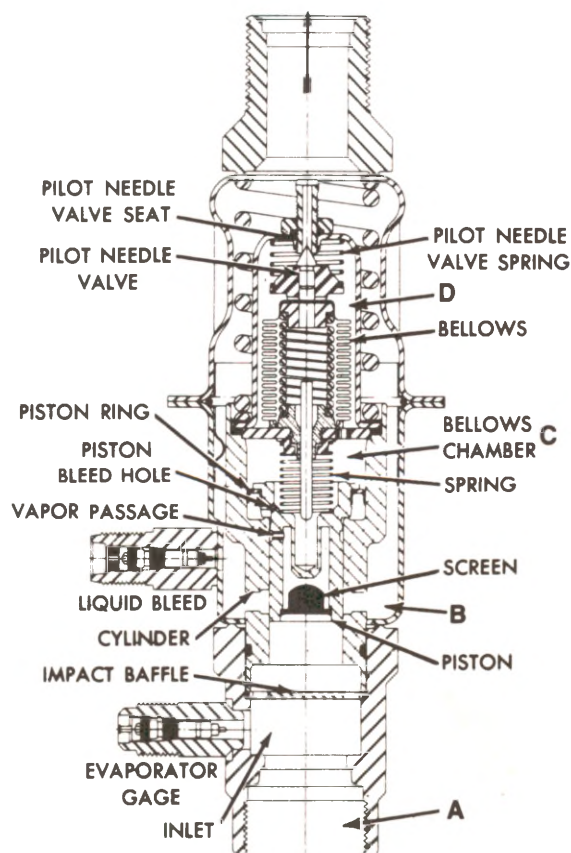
Pilot Operated Absolute Valve (POA) — Sectional View
